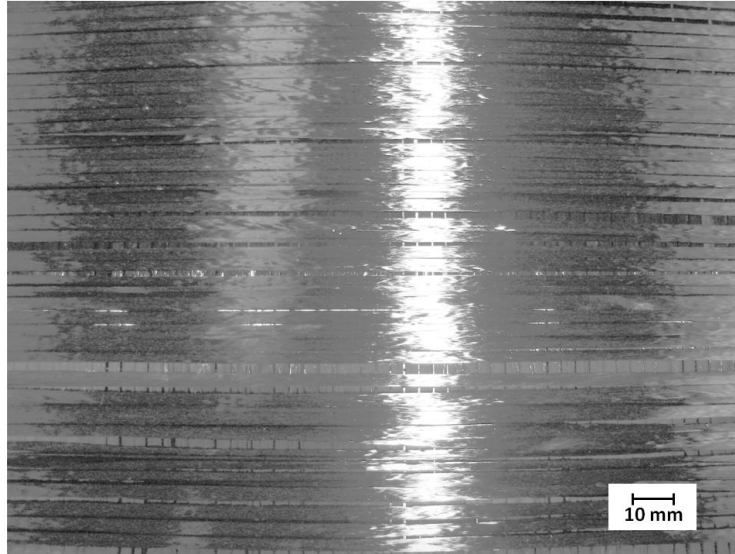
Tows arrangement around bobbin thread side of a seam
